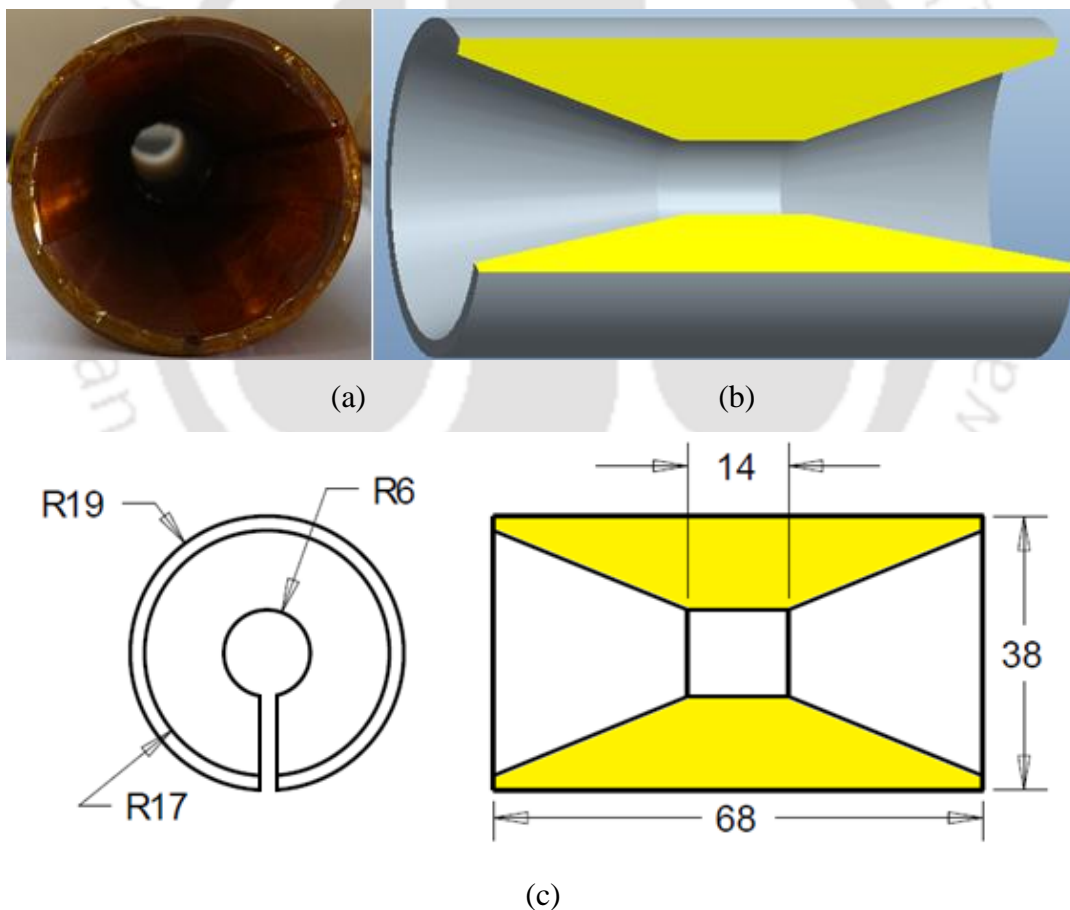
Field shaper used in EMC (a) an actual image of the field shaper, (b) cross-section of the CAD model, and (c) dimensions of the field shaper
